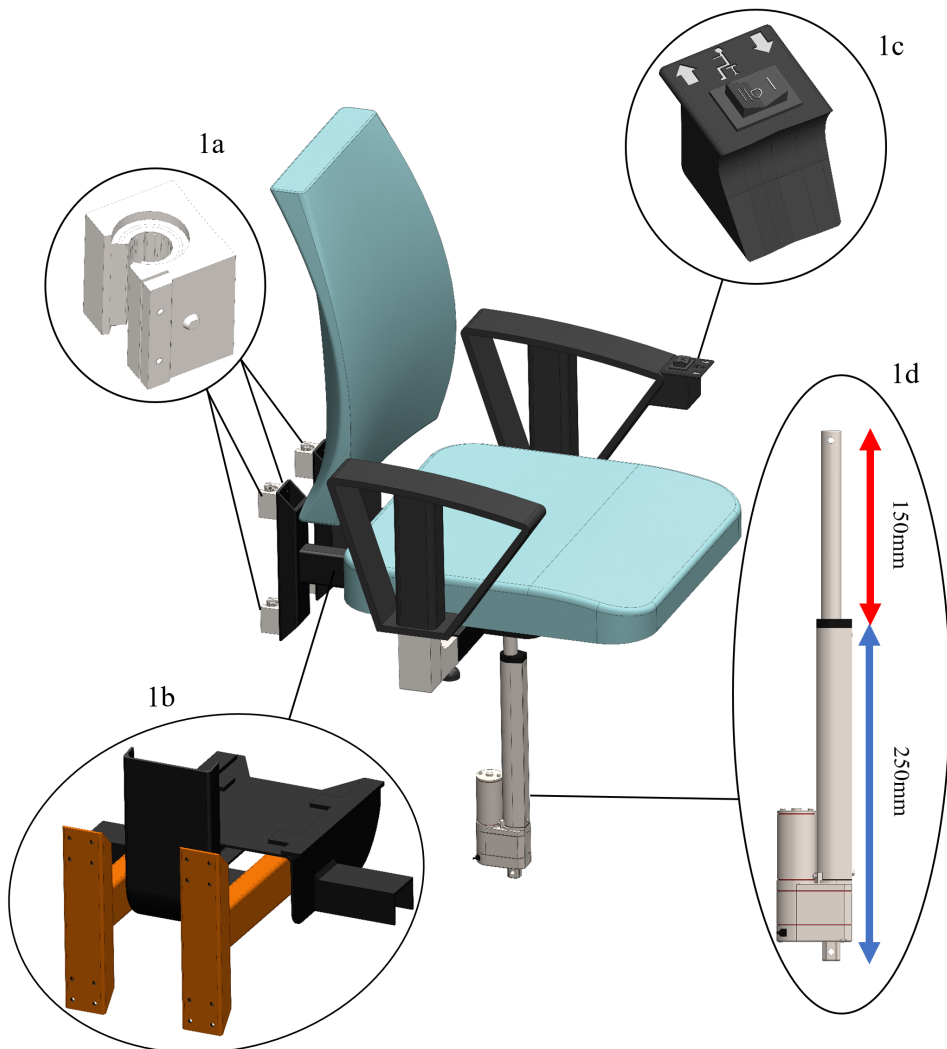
The modified Kinnarps 6000 with linear bearings (1a), four steel members welded to chair fixture plate (1b), DPDT switch (1c) and linear actuator (1d).
